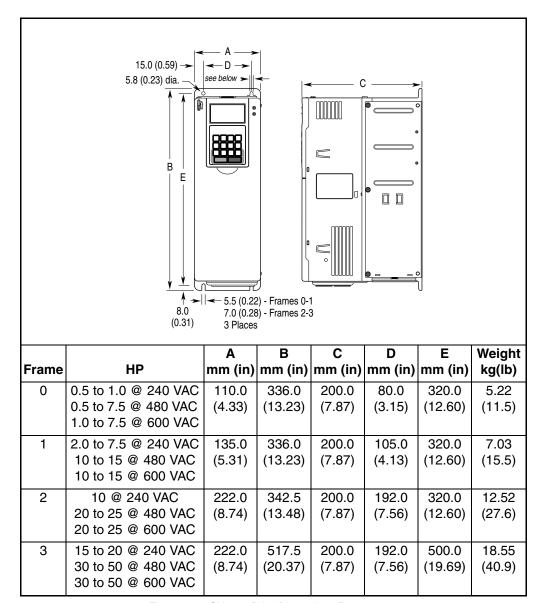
GV6000 Drive Dimensions Frames 0 - 3
